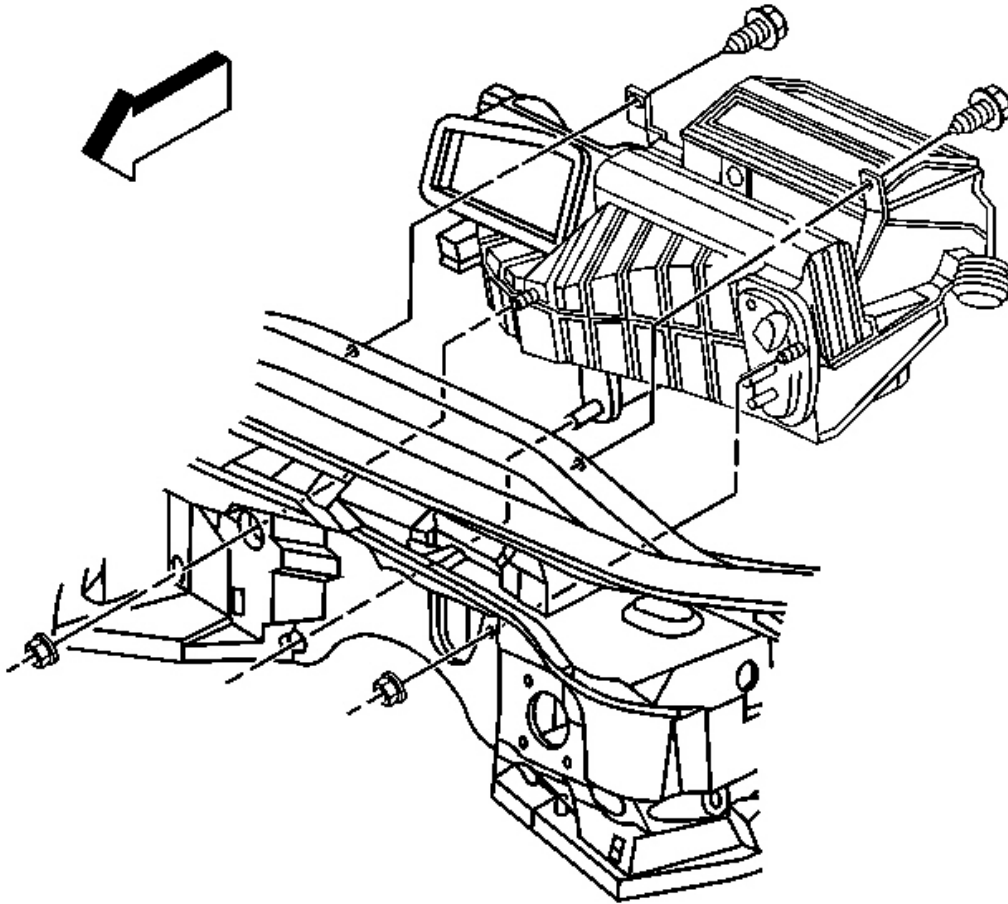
I/P Upper Support Beam, HVAC Module & Retaining Bolts
